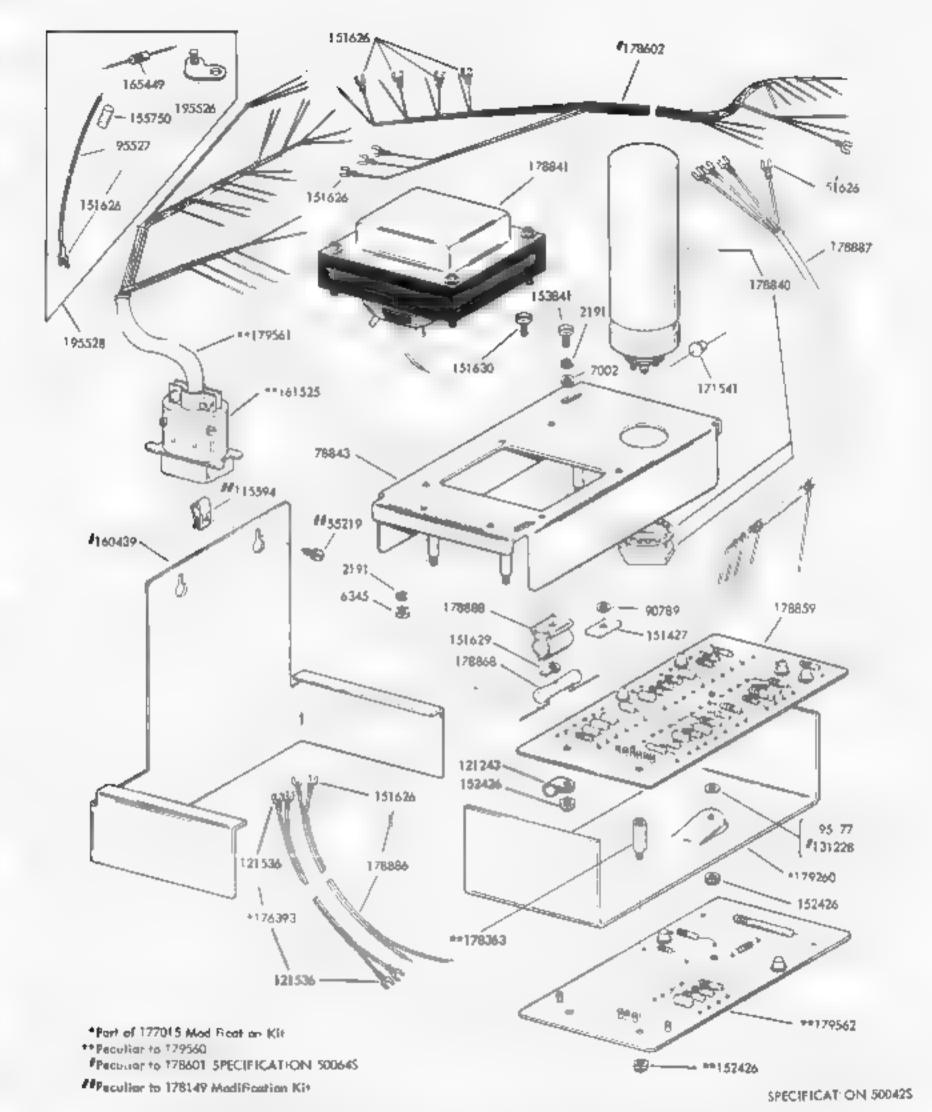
177010 AND 178601 ELECTRONIC SELECTOR MAGNET DRIVE ASSEMBLIES 179560 ELECTRONIC SELECTOR MAGNET DRIVE ASSEMBLY AND OPEN LINE DETECTOR
